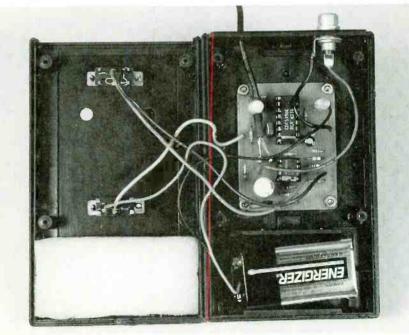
THE INSIDE OF THE COMPLETED UNIT. You can use the same case (see the Parts List) or any other that will accept the board and a 9-volt battery.
